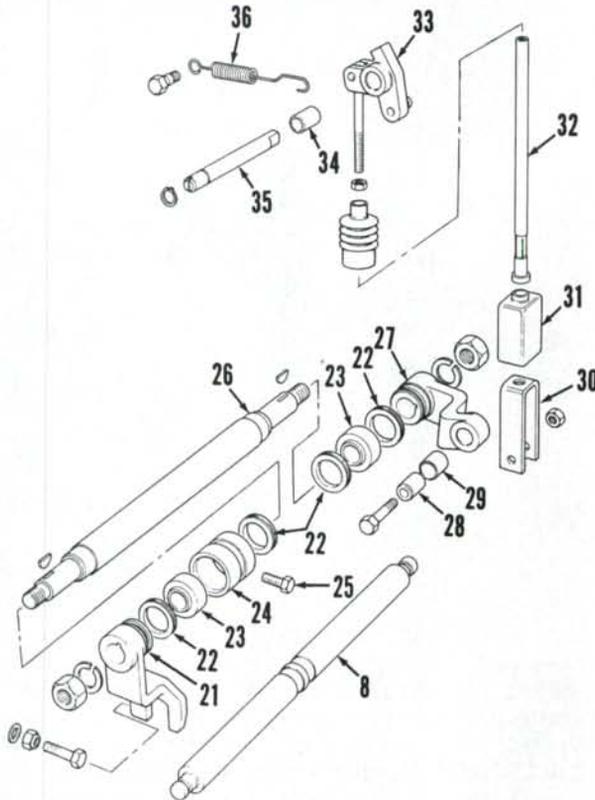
Exploded view of draft sensing transfer linkage used on Model 1594.
